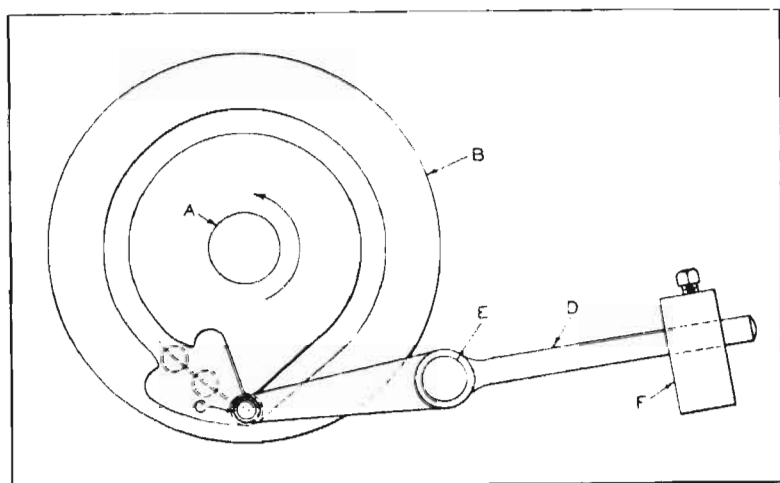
Cam Arrangement for Controlled Speed of Shaft Driven by Hand-crank.
